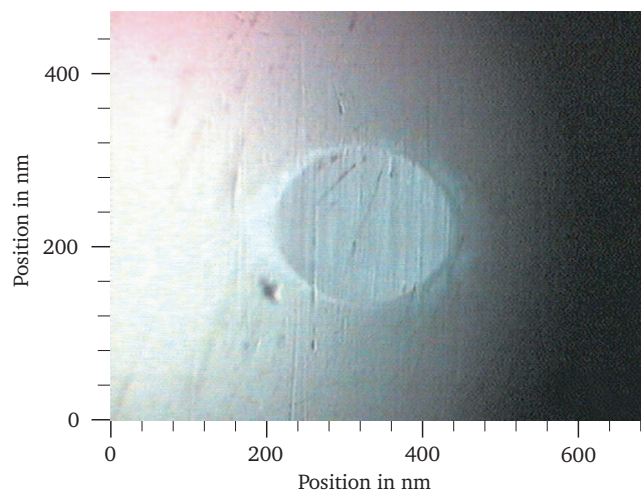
Abrasive wear on a ruby tip due to the contact with a planar stainless steel work piece [Renishaw 06B].
